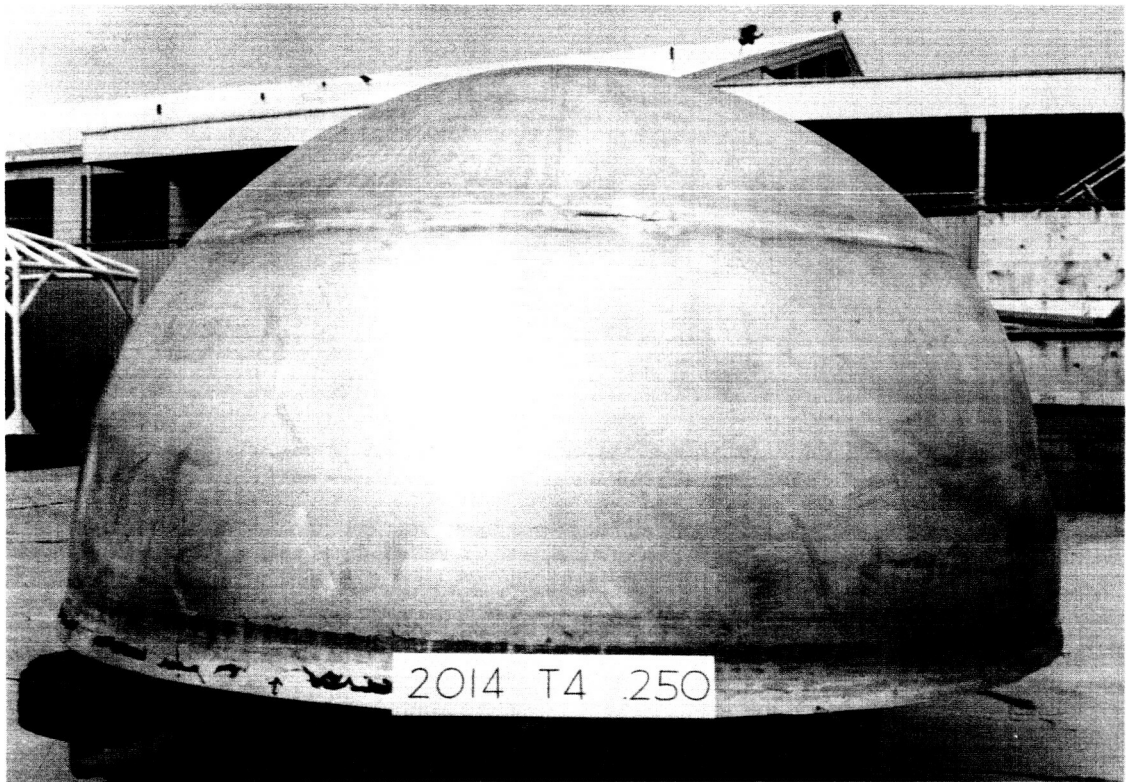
Figure V Bulkhead No. 1 - Showing Circumferential Failure and Position of Sound Longitudinal Weld. Approximately 85% Formed.
